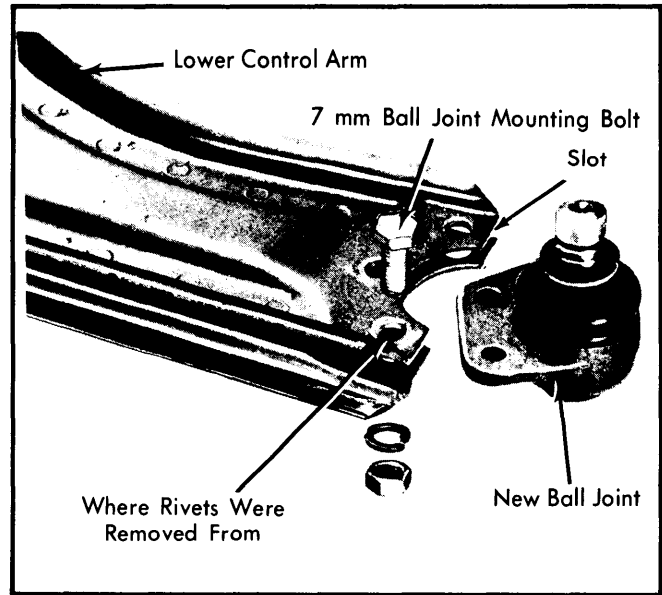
New Ball Joint Installation Location in Lower Control Arm
